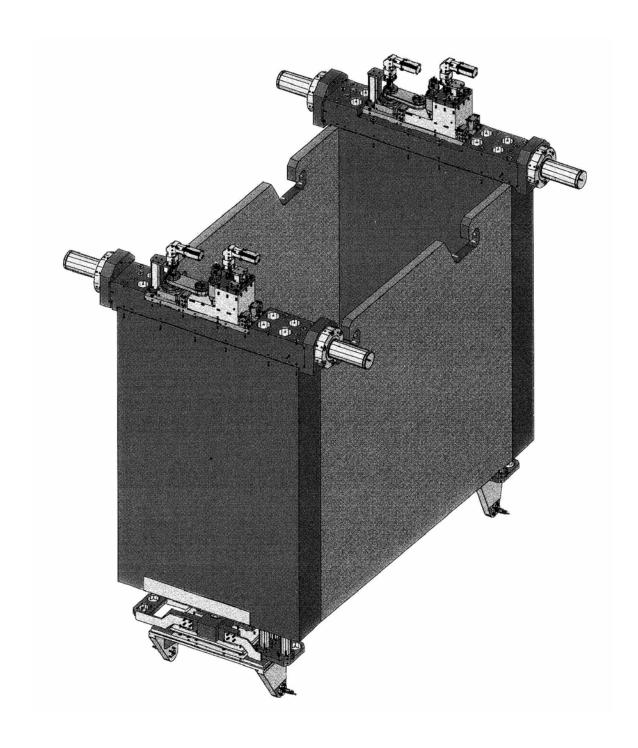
Isometric drawing of the Target/Baffle module mainframe.
